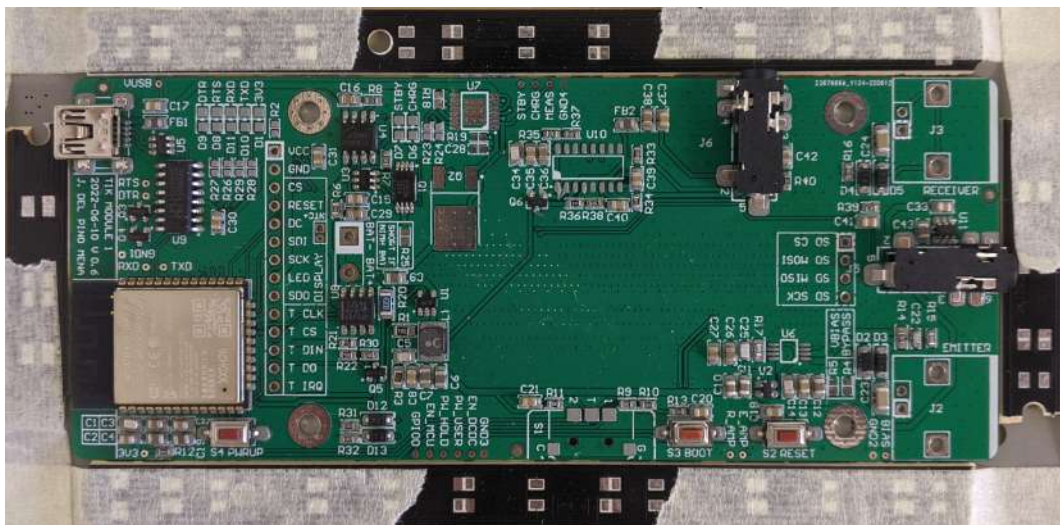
PCB with almost all components placed on top of the solder paste.
